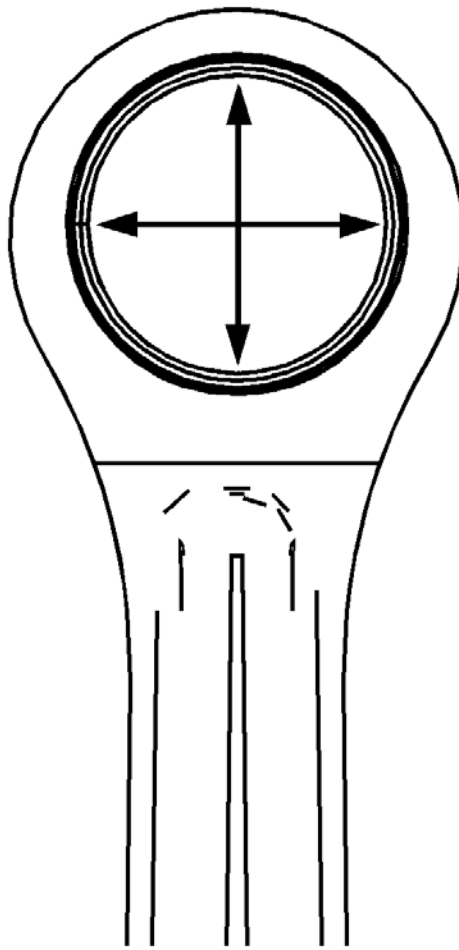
Checking Connecting Rod Piston Pin Bore Dimensions
